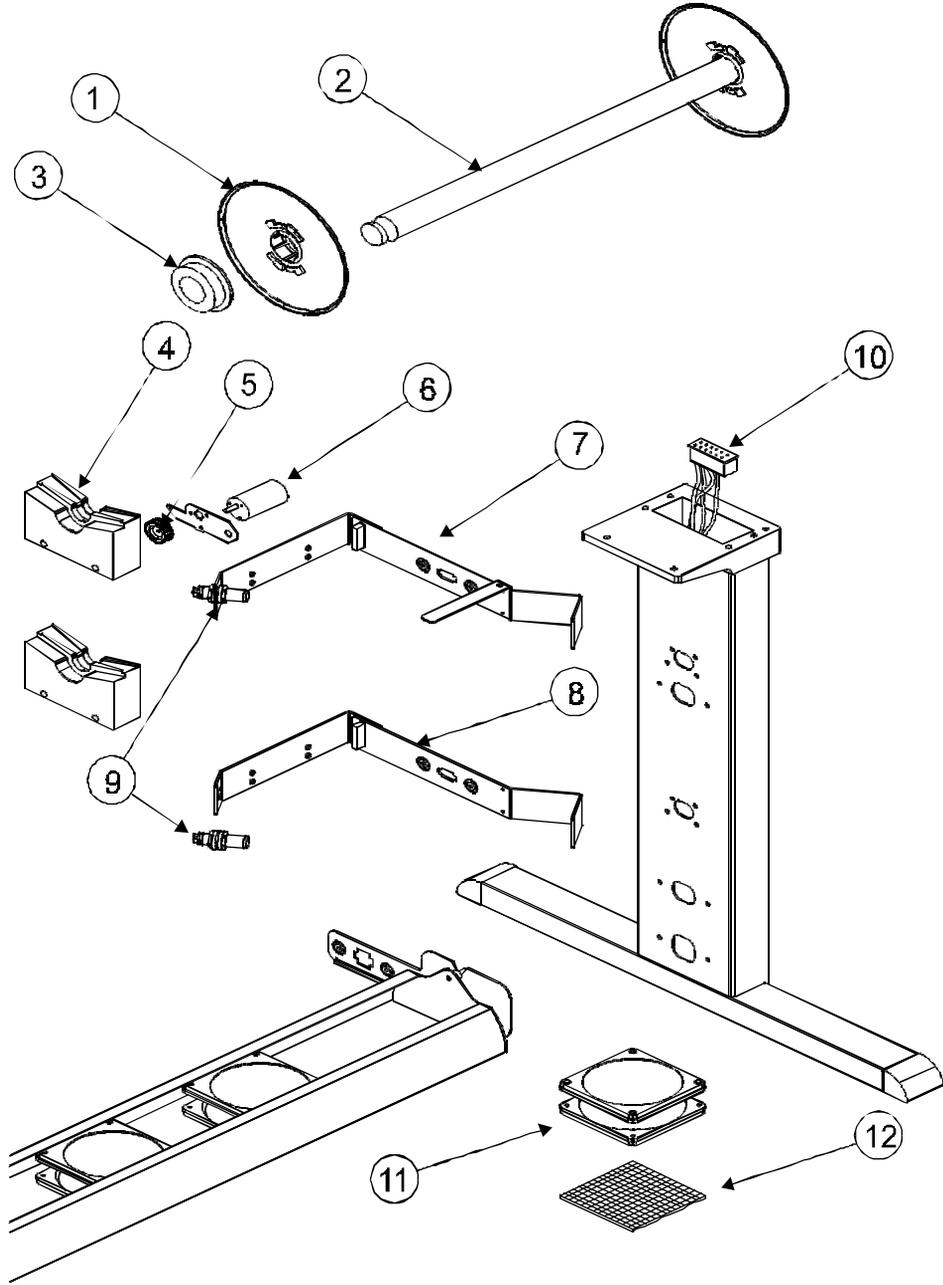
Power Feed and Take-Up Parts Breakdown.
